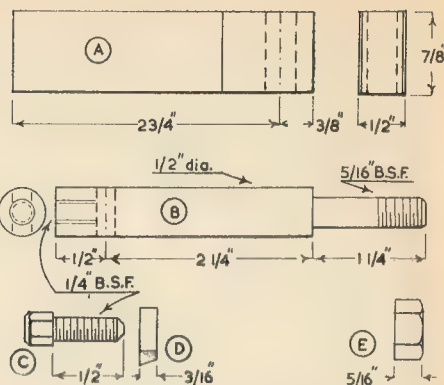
The keyway-cutting tool. *A* the tool shank; *B* the tool bar; *C* the clamping screw; *D* the tool bit; and *E* the bar securing nut
